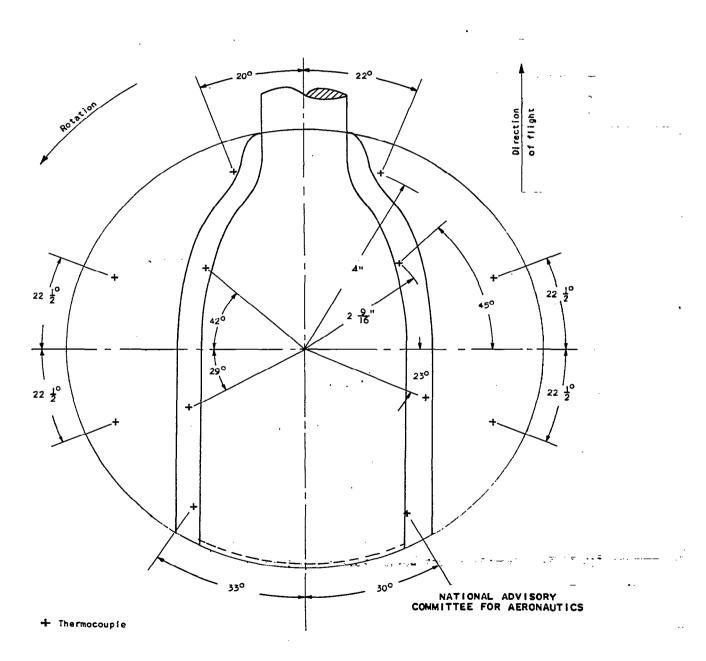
Location of thermocouples between cooling cap and turbine rotor.
